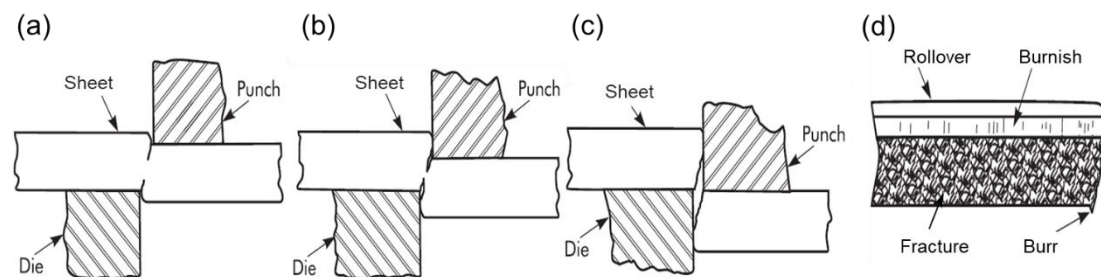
Shearing under a relatively large clearance: (a) fracture initiation, (b) crack growth, (c) complete separation, and (d) all sheared edge features on the edge [28].
